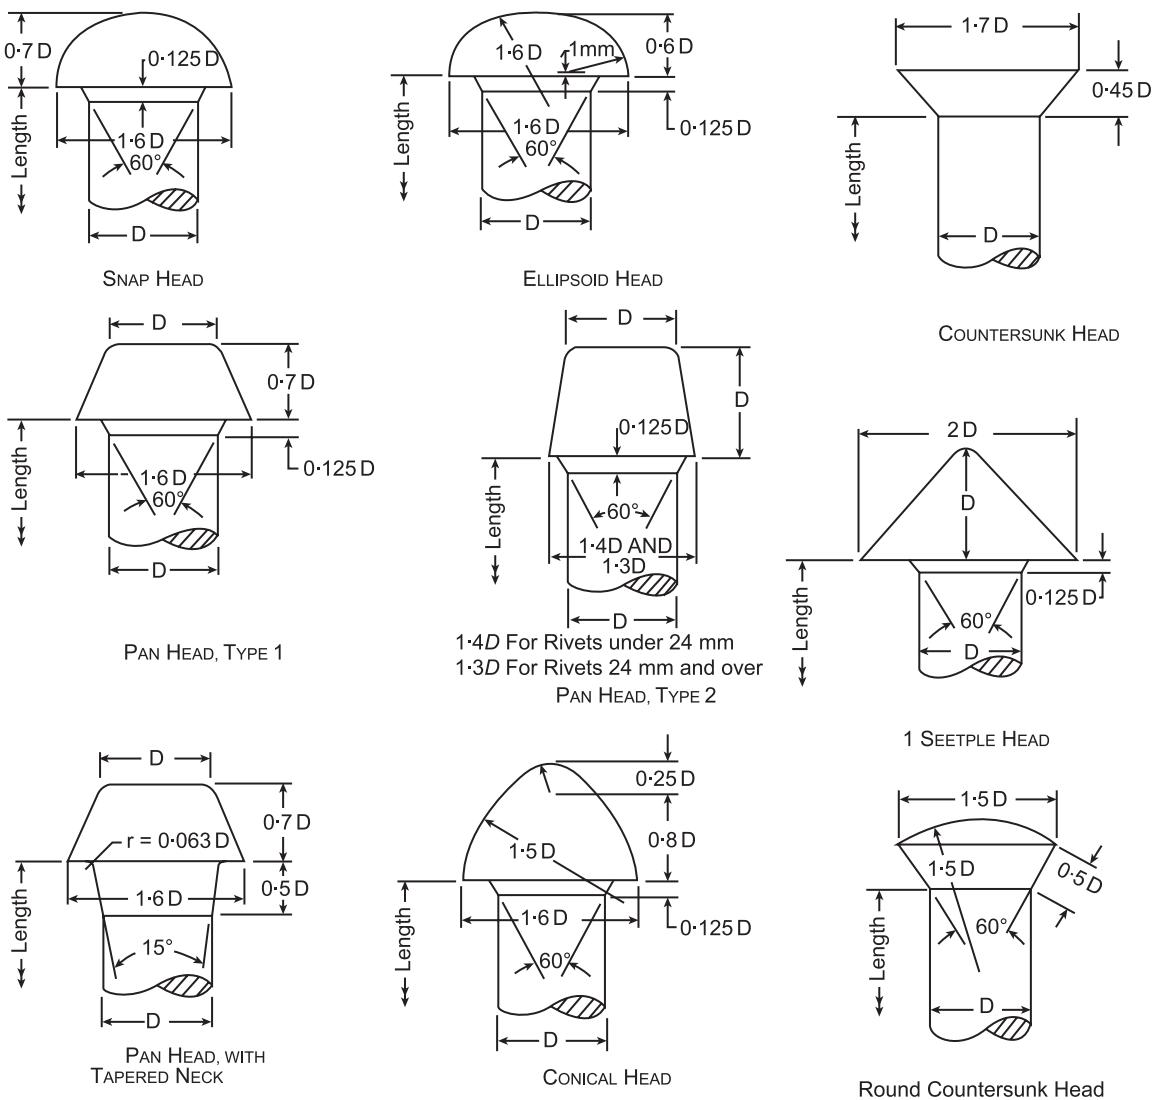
Boiler rivets (12 to 48 mm diameter). For preferred length and diameter combination, refer to Table 13-13.
